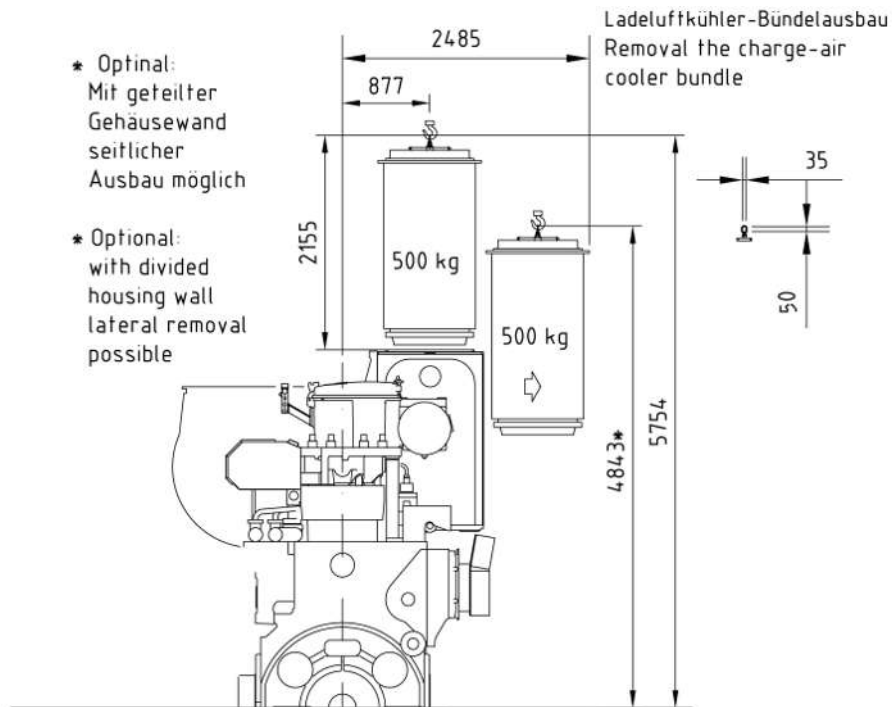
Installation drawing 12V, 14V, 16V engine – Turbocharger on counter coupling side
